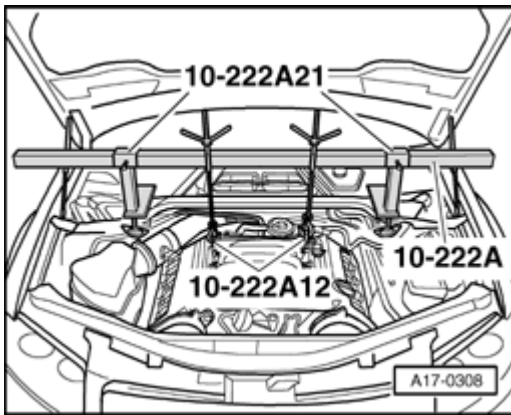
Securing Shackles 10 - 222 A/12 To Right Rear Engine Lifting Eyelets
